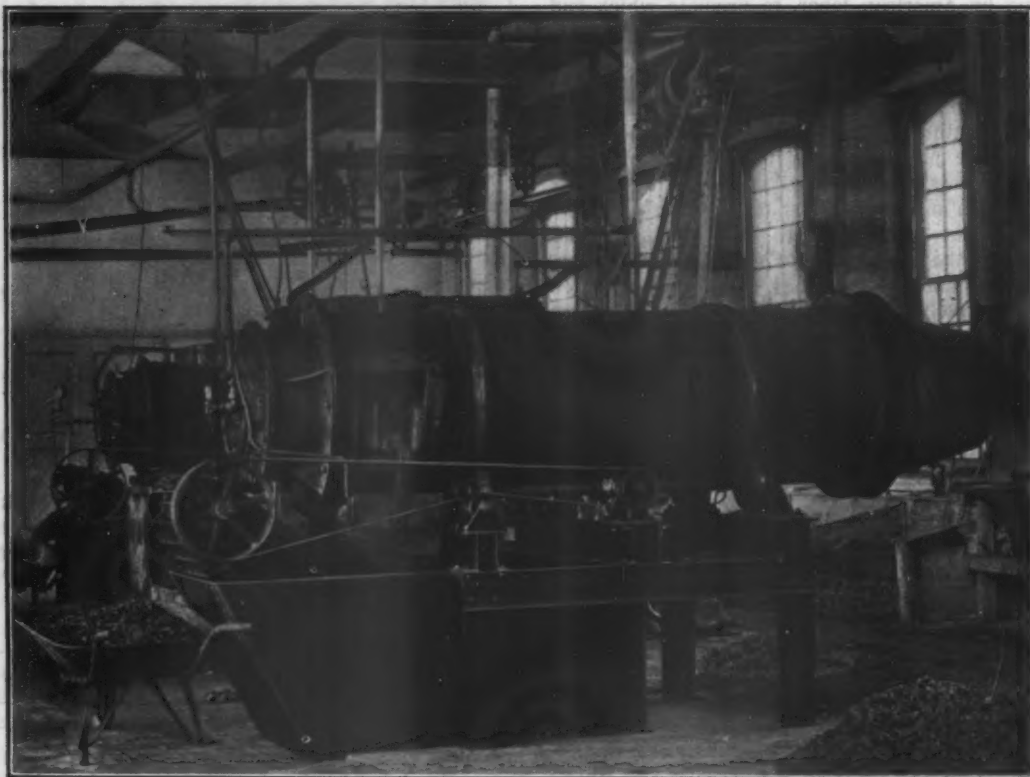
View of the Opposite Side, Further Showing the Operating Mechanism.
